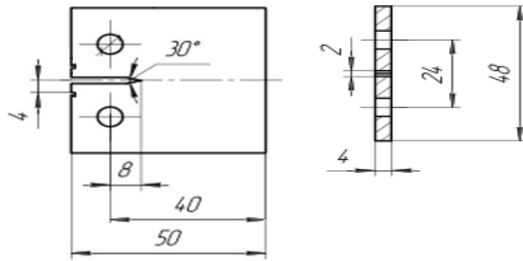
Geometry of the CT-specimen. All dimensions are in millimeters.
